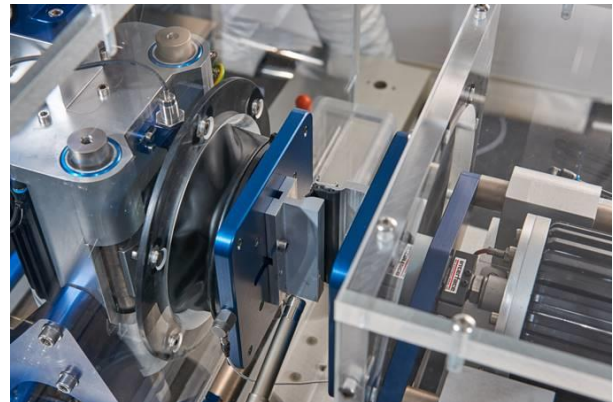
Air bearings enable frictionless motion of the mounting tables in x-, y- and z-axis
